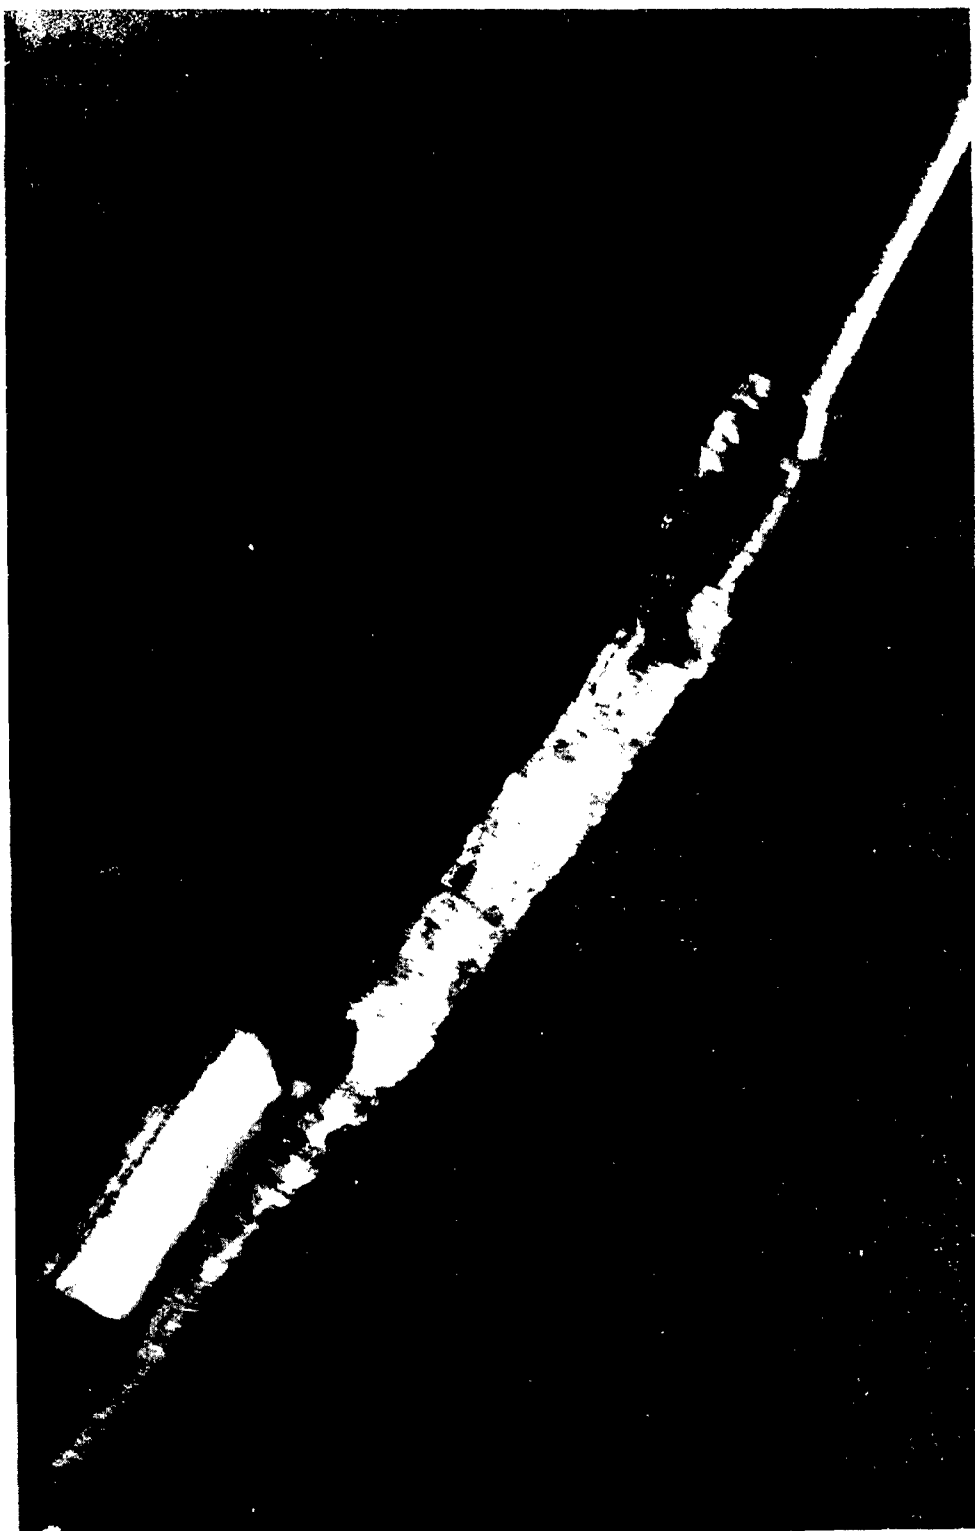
Left Pin - Fluid-Cooled Turbine Blade - Test Specimen.
